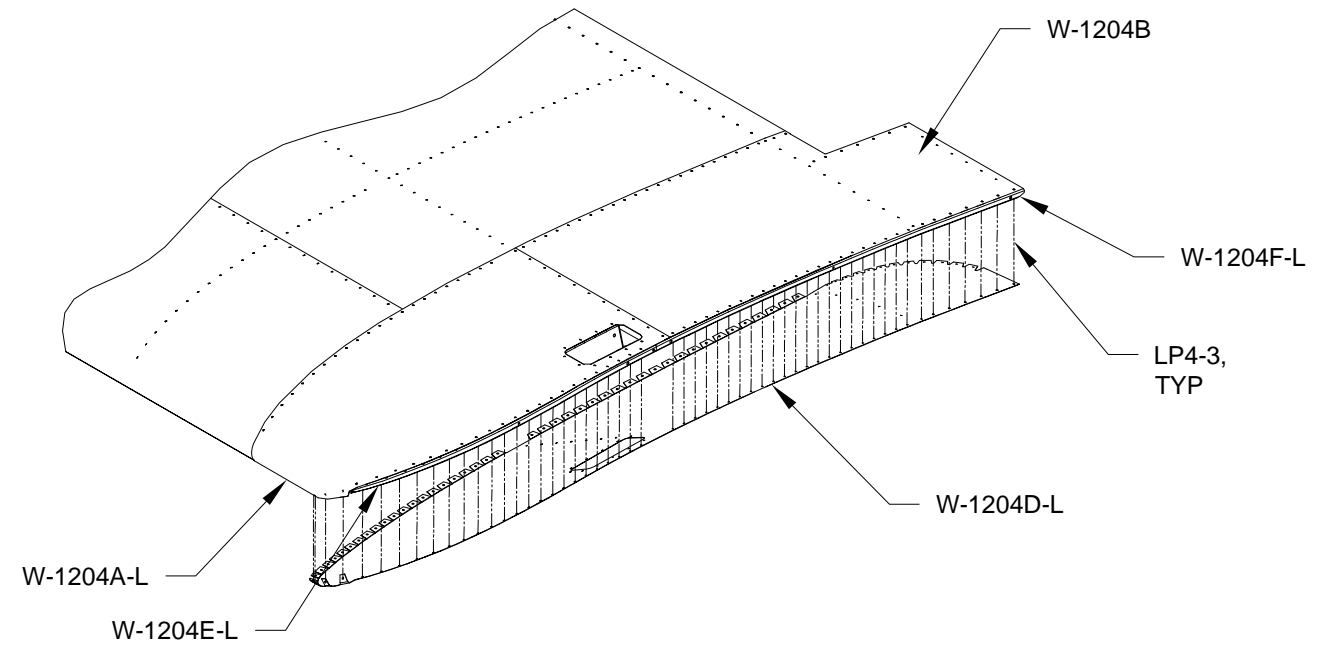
ATTACHING THE WING TIP CLOSE-OUT
